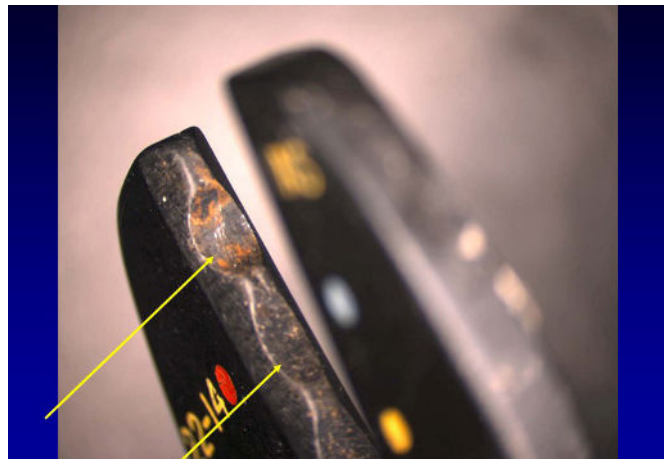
B: Close-up of crimping jaws on a multipurpose electrician's tool
